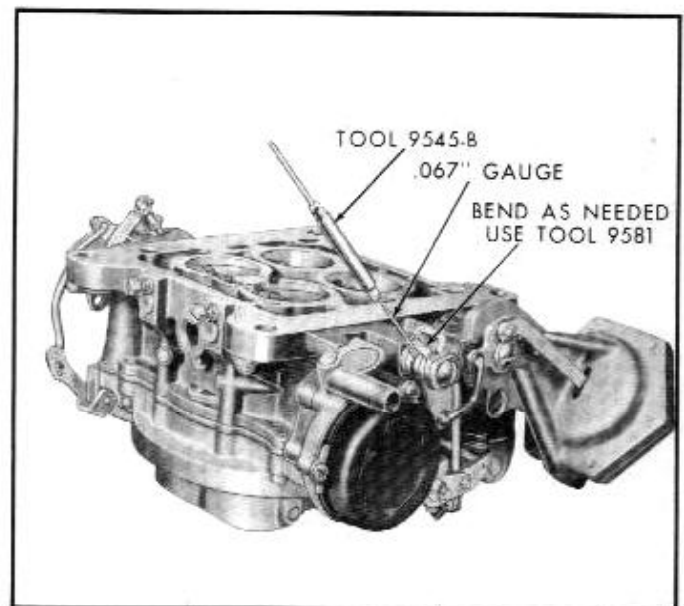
E-18—Primary Throttle Shaft Dog Adjustment — Front Tang
